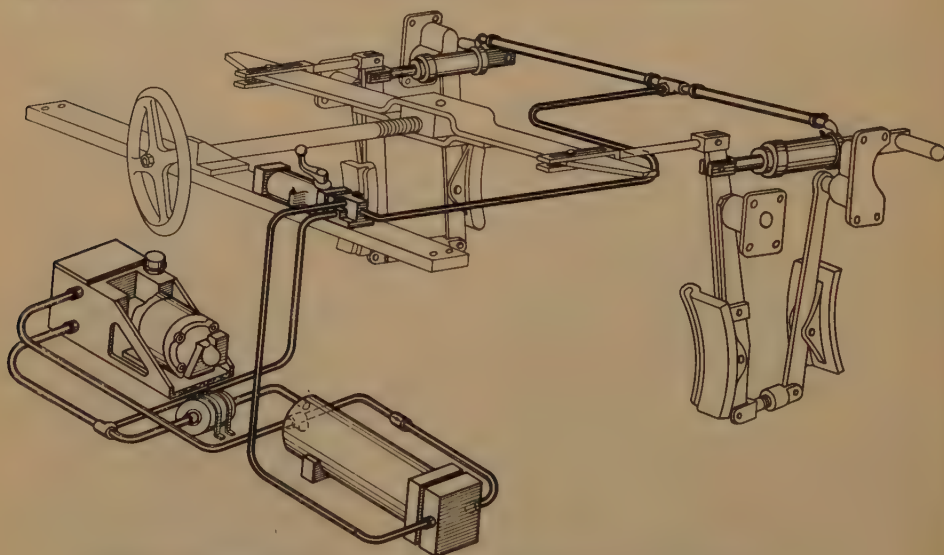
MOUNTING OF HYDRAULIC BRAKES HAVING SLOT ON EQUALIZING LEVER.
